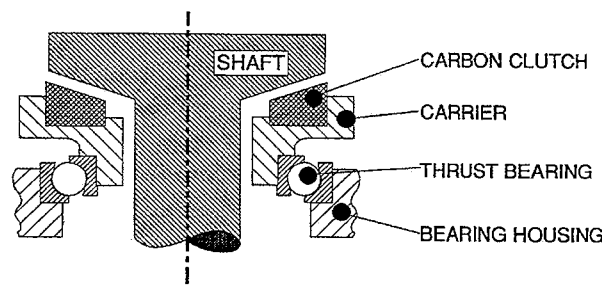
MHTGR Axial Auxiliary Bearing Configuration.
